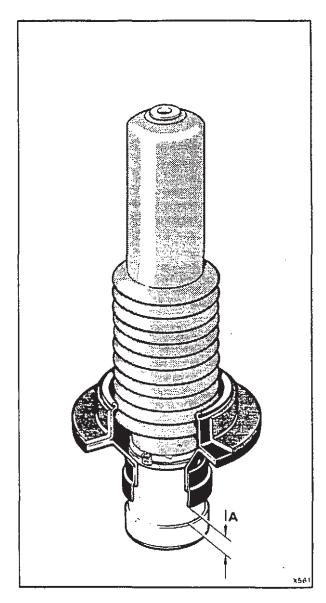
Spring support plate, collar, and sleeve assembly
